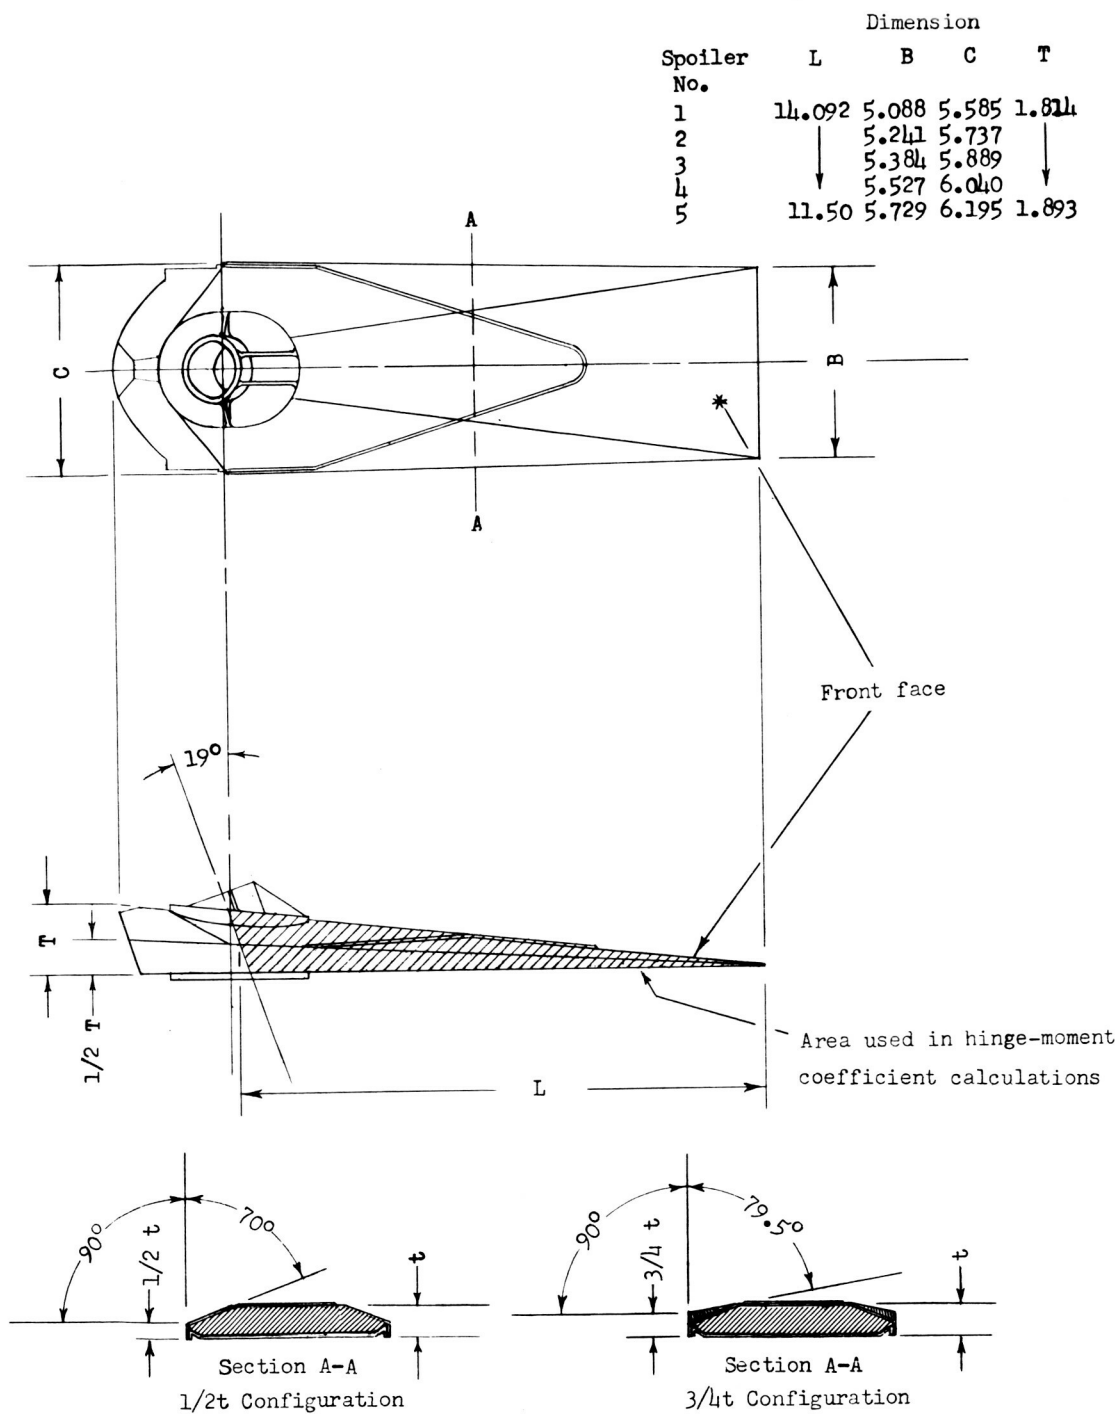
A detailed sketch showing the dimensions of the paddle spoilers and indicating the two spoiler configurations used in the flight tests. All dimensions are in inches.
